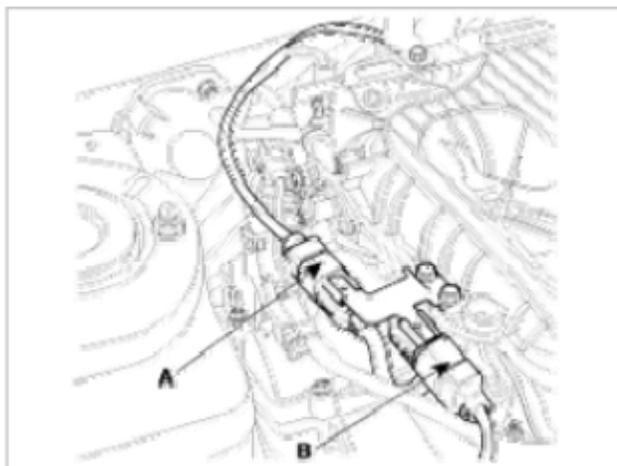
Locating RH Injector Connector And Ignition Coil Connector
